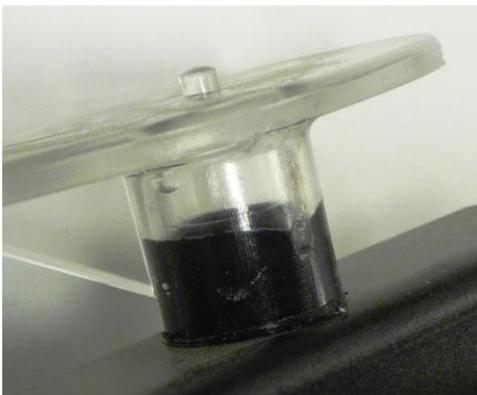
An attractive spin weld, free of tool marking, particulate, and flash
